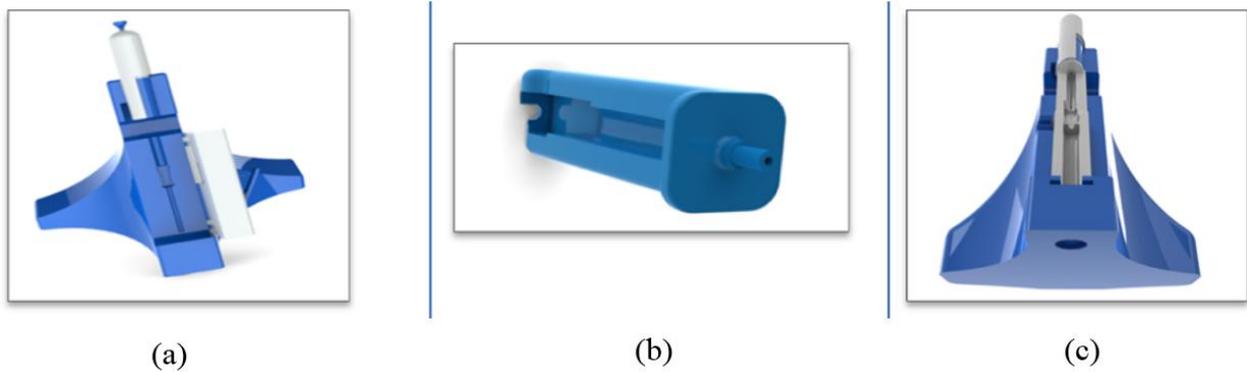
CAD renderings of (a) first generation extraction device, (b) portable hand-held extraction device, and (3) “ReCatheter” design
